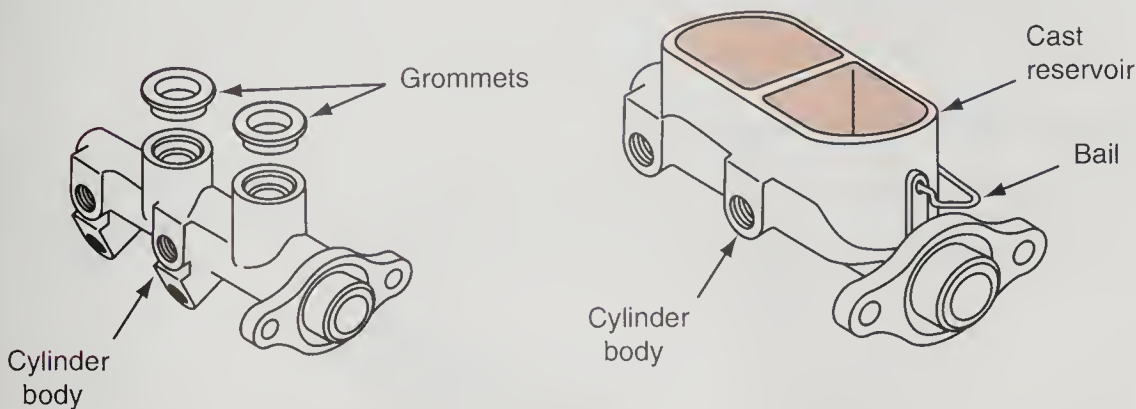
The master cylinder assembly to the left is the most common one in use today. However, there are still many vehicles on the road that are equipped with the one-piece unit shown to the right.
